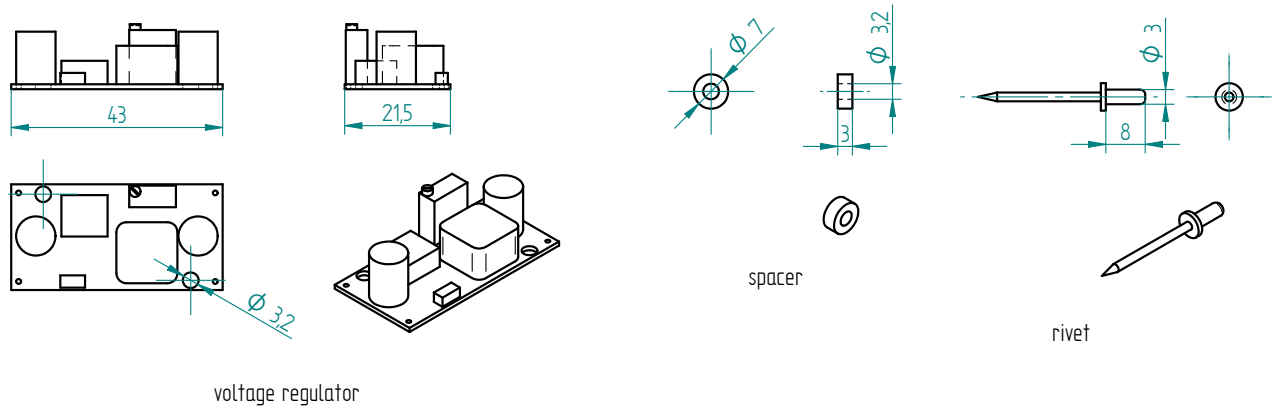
power unit p/housing/voltage regulator parts drawing
